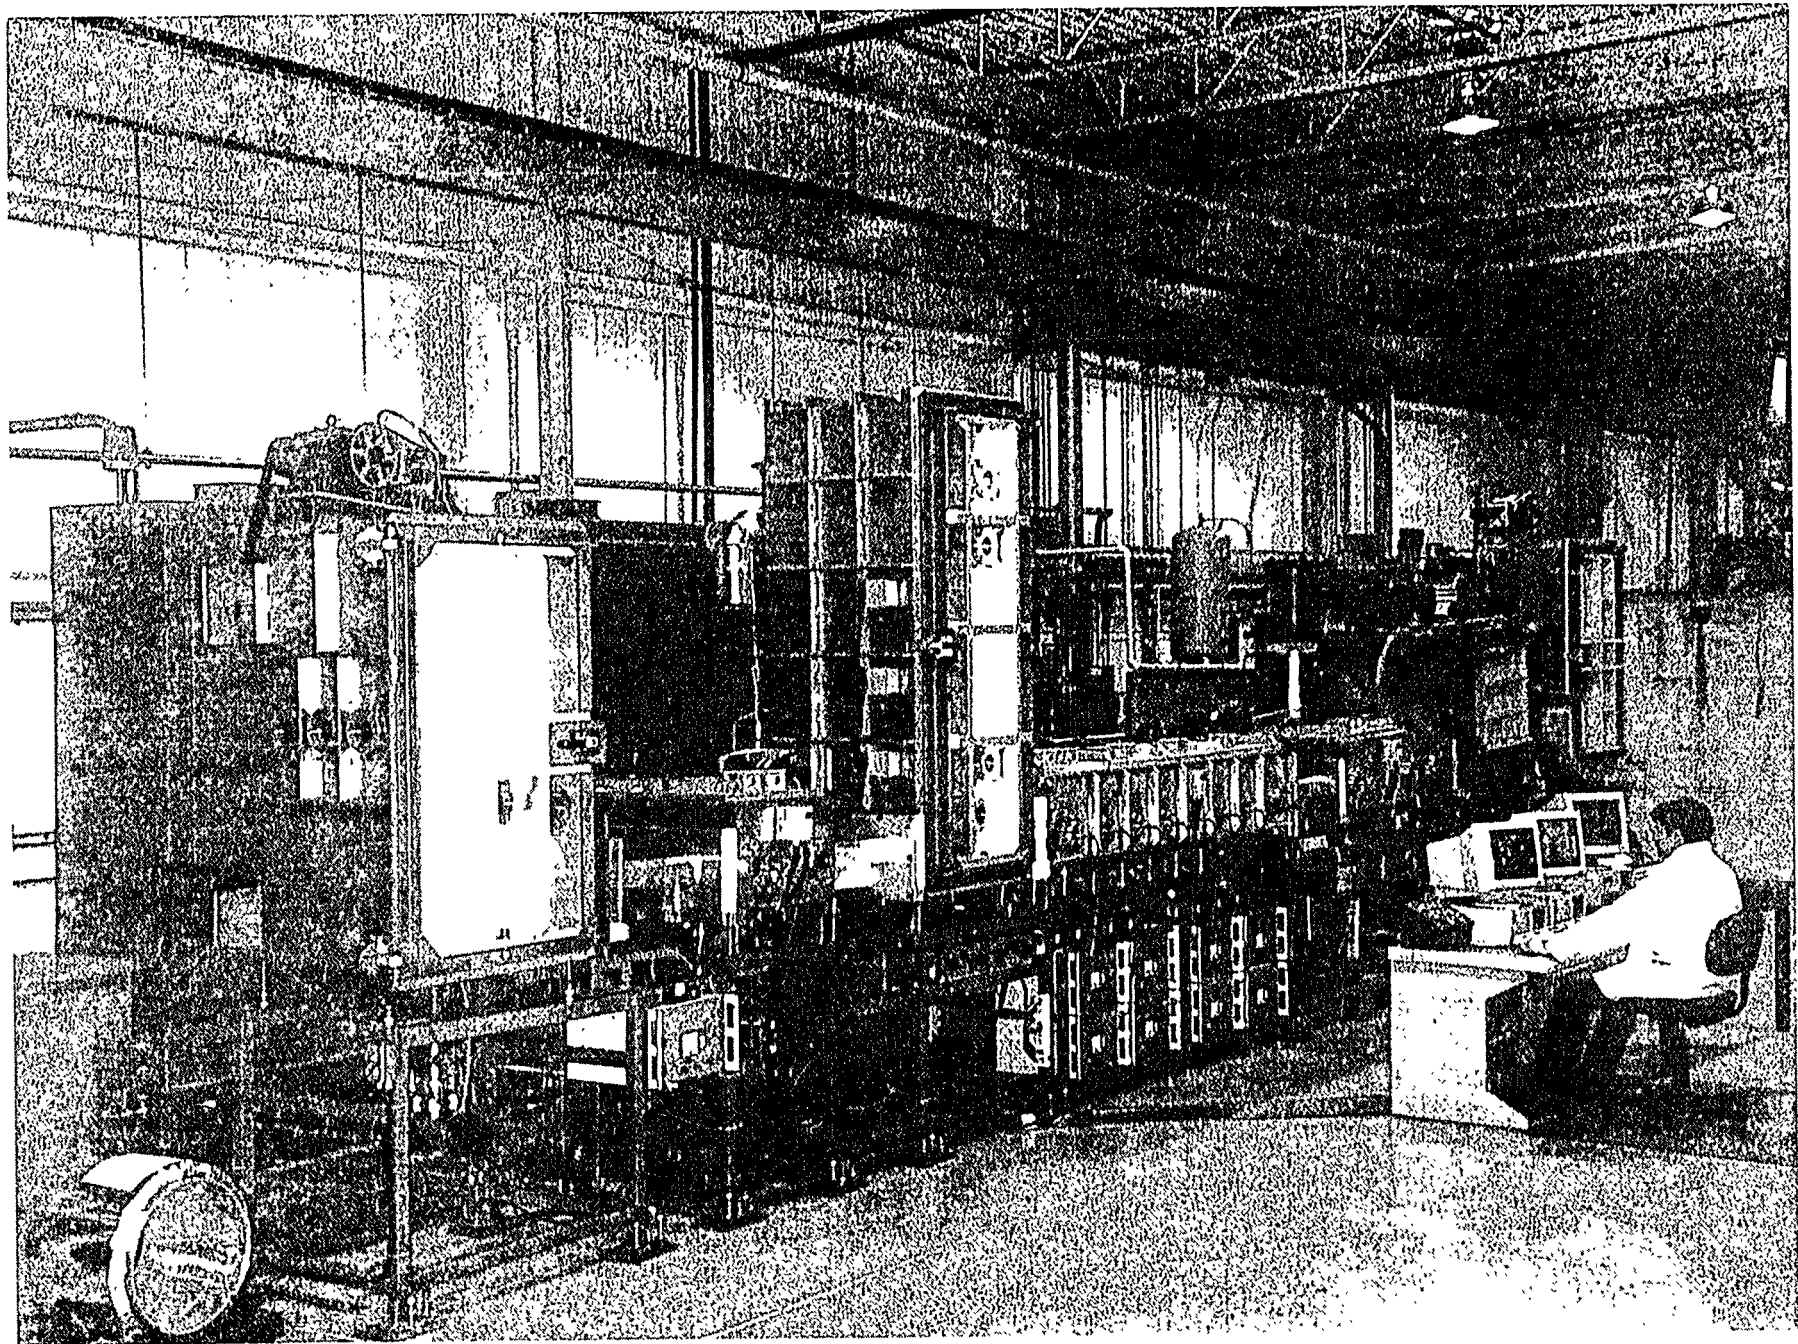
ECD's multipurpose continuous roll-to-roll a-Si alloy solar cell deposition machine.
